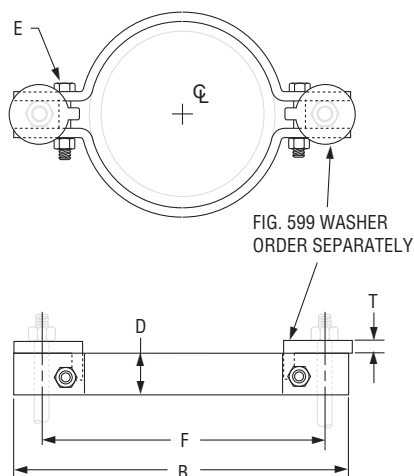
, Fig. 599: Weight (lbs) • Dimensions (in)
